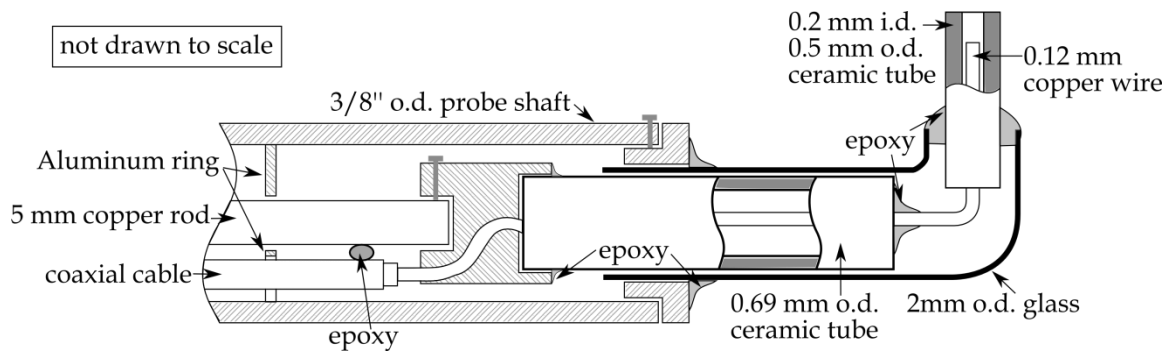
Cross-sectional drawing of a “soda-straw probe”.
